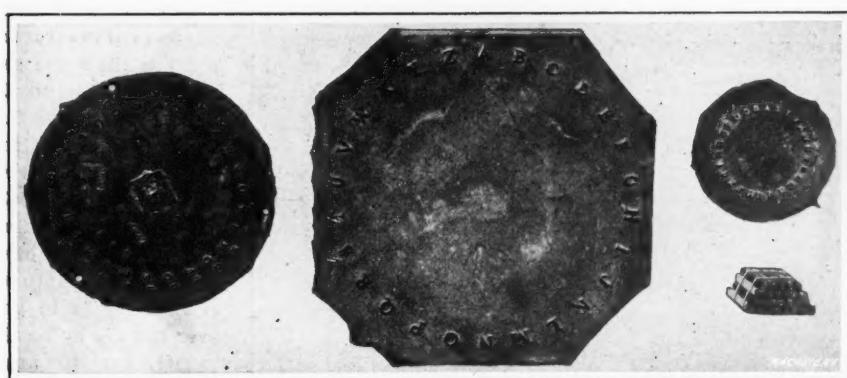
Models used in making Lettering Punches and a Finished Set of Punches
